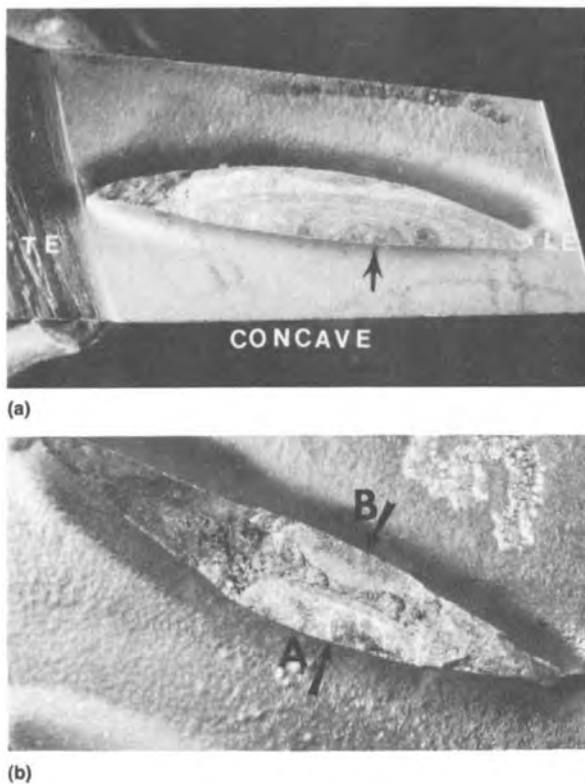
First-stage compressor blades that fractured due to corrosion fatigue originating in corrosion pits like those shown in Fig. 8. Note that (a) had one fatigue origin (arrow) on the mid-pressure side. 5x; shown at 70%. Arrows in (b) show fatigue origins on both the suction (A) and the pressure (B) sides. These fatigue fractures in cast 17-4PH material are ambient-temperature fractures. Pitting was caused by seawater corrosion. 6.5x; shown at 70%
